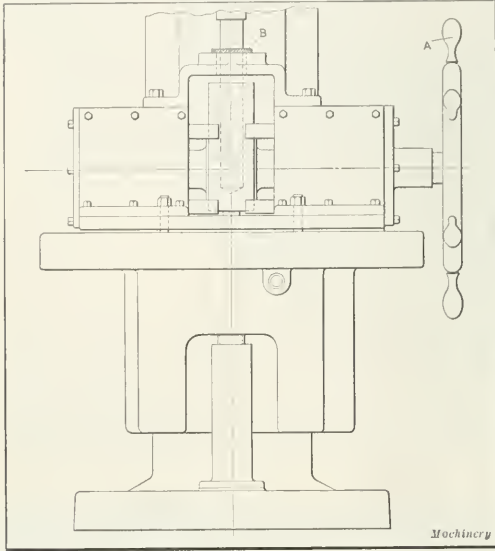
Fixture used in holding 18-pound Shell Blanks when drilling thread, lever E is pulled down, withdrawing a stop which allows the spindle to "feed" back into the housing. The spindle driving mechanism is then shifted to slow speed, and the spindle moves back at the required pitch—slightly over one complete revolution of the work (which takes forty seconds) finishing the thread. The work is rotated at 200 R. P. M. for turning and facing, and the production is twenty per hour.
